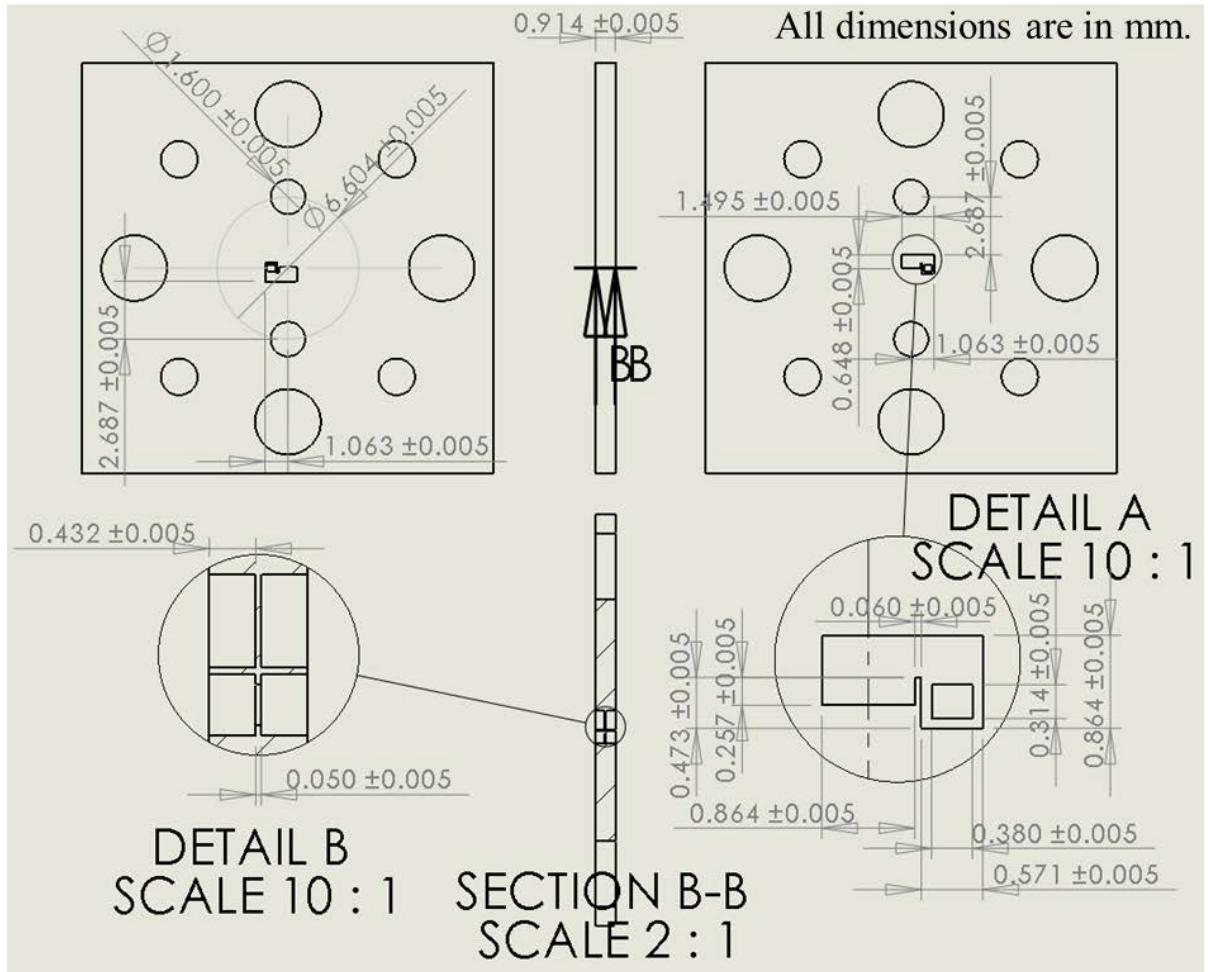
Detailed engineering drawing of the WR3-band waveguide filter in Chapter 7
